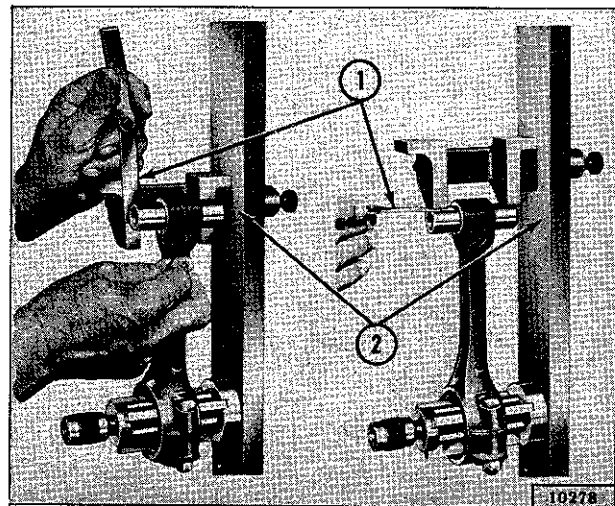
CHECKING CONNECTING ROD ALIGNMENT.
